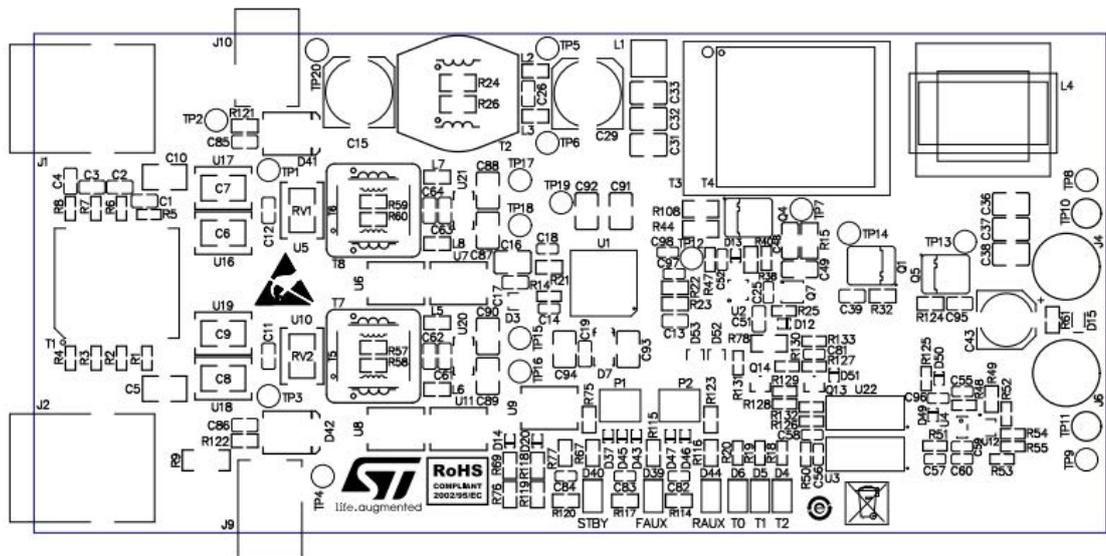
STEVAL-POE003V1 reference design: PCB bottom assembly
